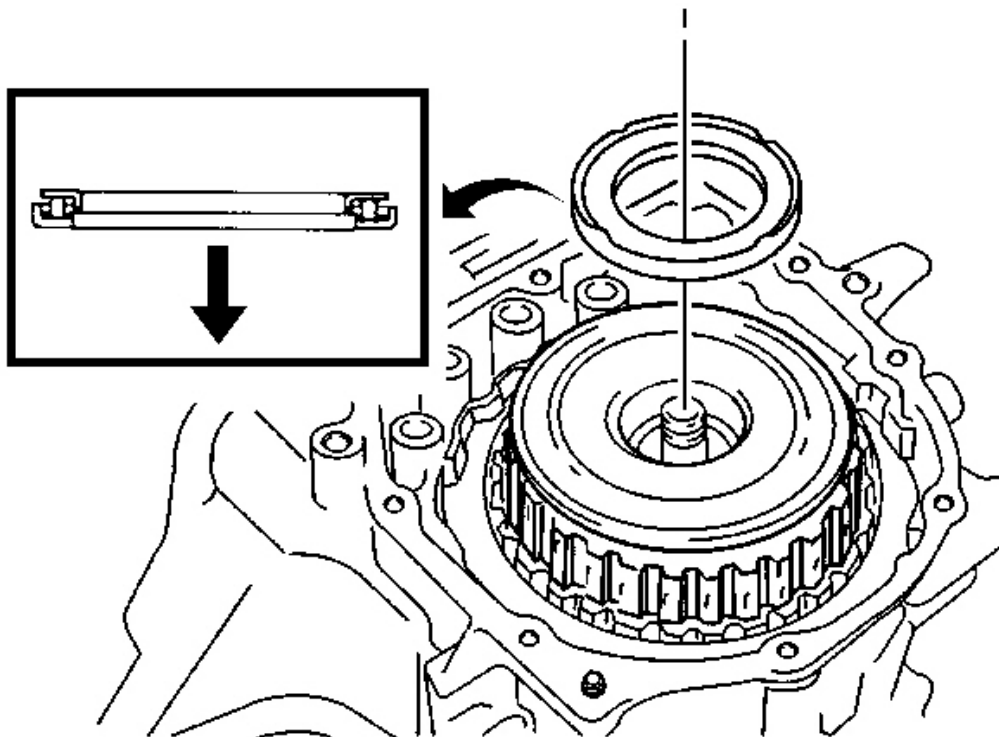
Thrust Needle Roller Bearing & Forward/Reverse Clutch Assembly
